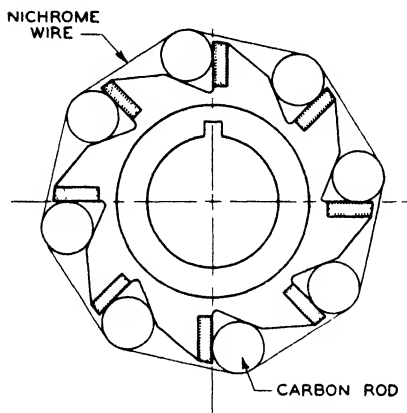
Use of Carbon Rods To Hold Carbide Tips in Place During Furnace Brazing
